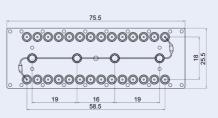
Schematic drawing of the in-line fiber sensor chip Fluidic 1457
